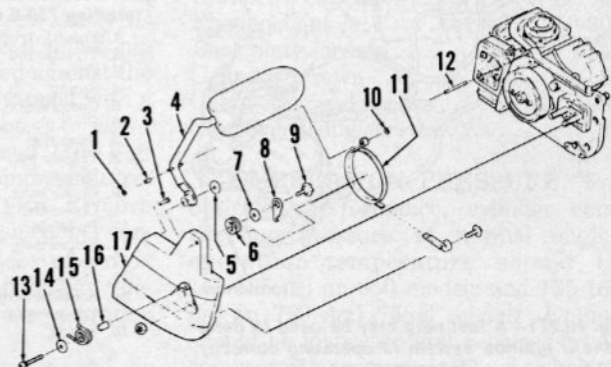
Exploded view of chain brake mechanism used on Model 360SL.
